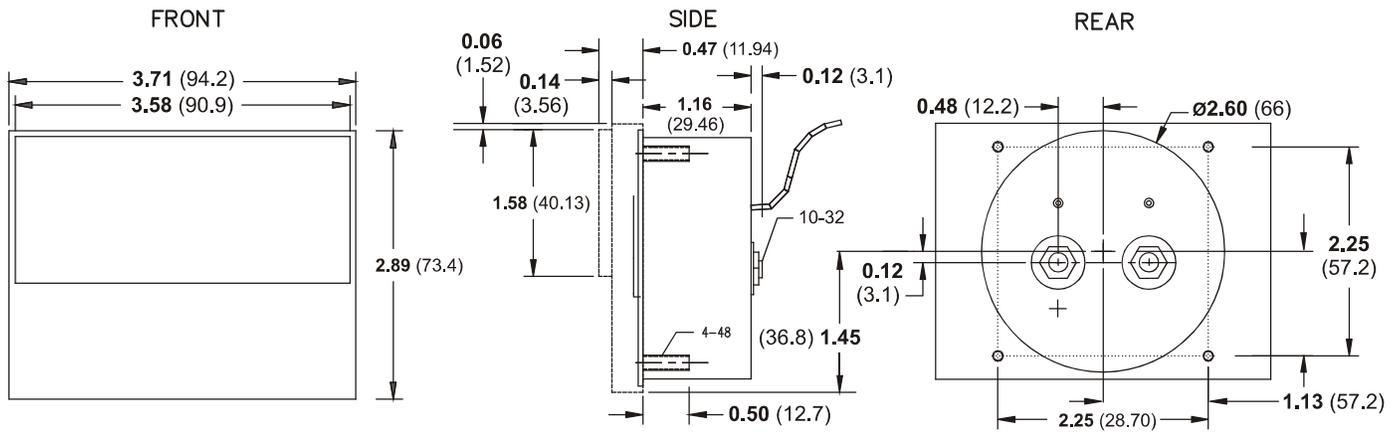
ACCESSORY TENSION METER DIMENSIONS
